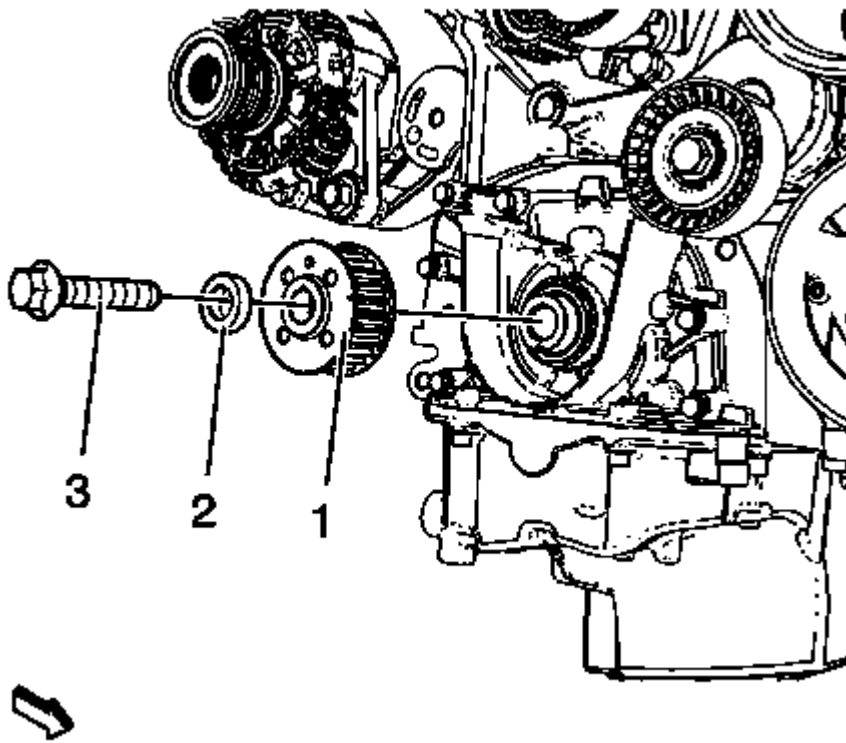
Crankshaft Sprocket Bolt And Spacer
